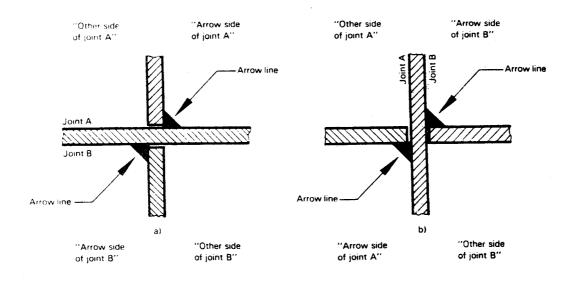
CRUCIFORM JOINT WITH TWO FILLET WELDS
